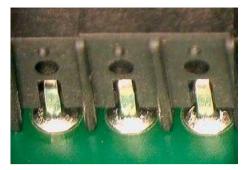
Typical lean THR soldering spot on the secondary side of the PCB with more than 75% soldering pad wetting and 100% perimeter wetting
